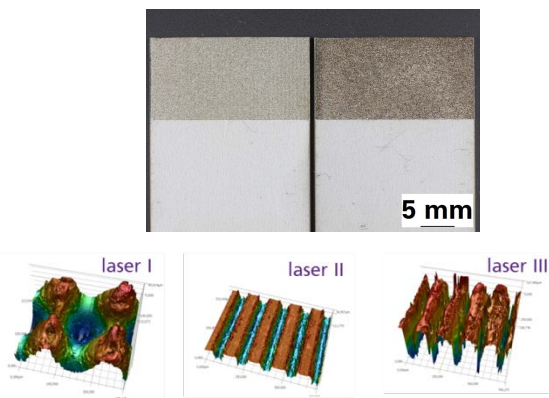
laser macro structuring of mild steel (top left: laser structuring I; right: laser structuring III bottom left: laser structuring I (R_z : 109 μm); middle: laser structuring II (R_z : 115 μm), right: laser structuring III (R_z : 350 μm))
